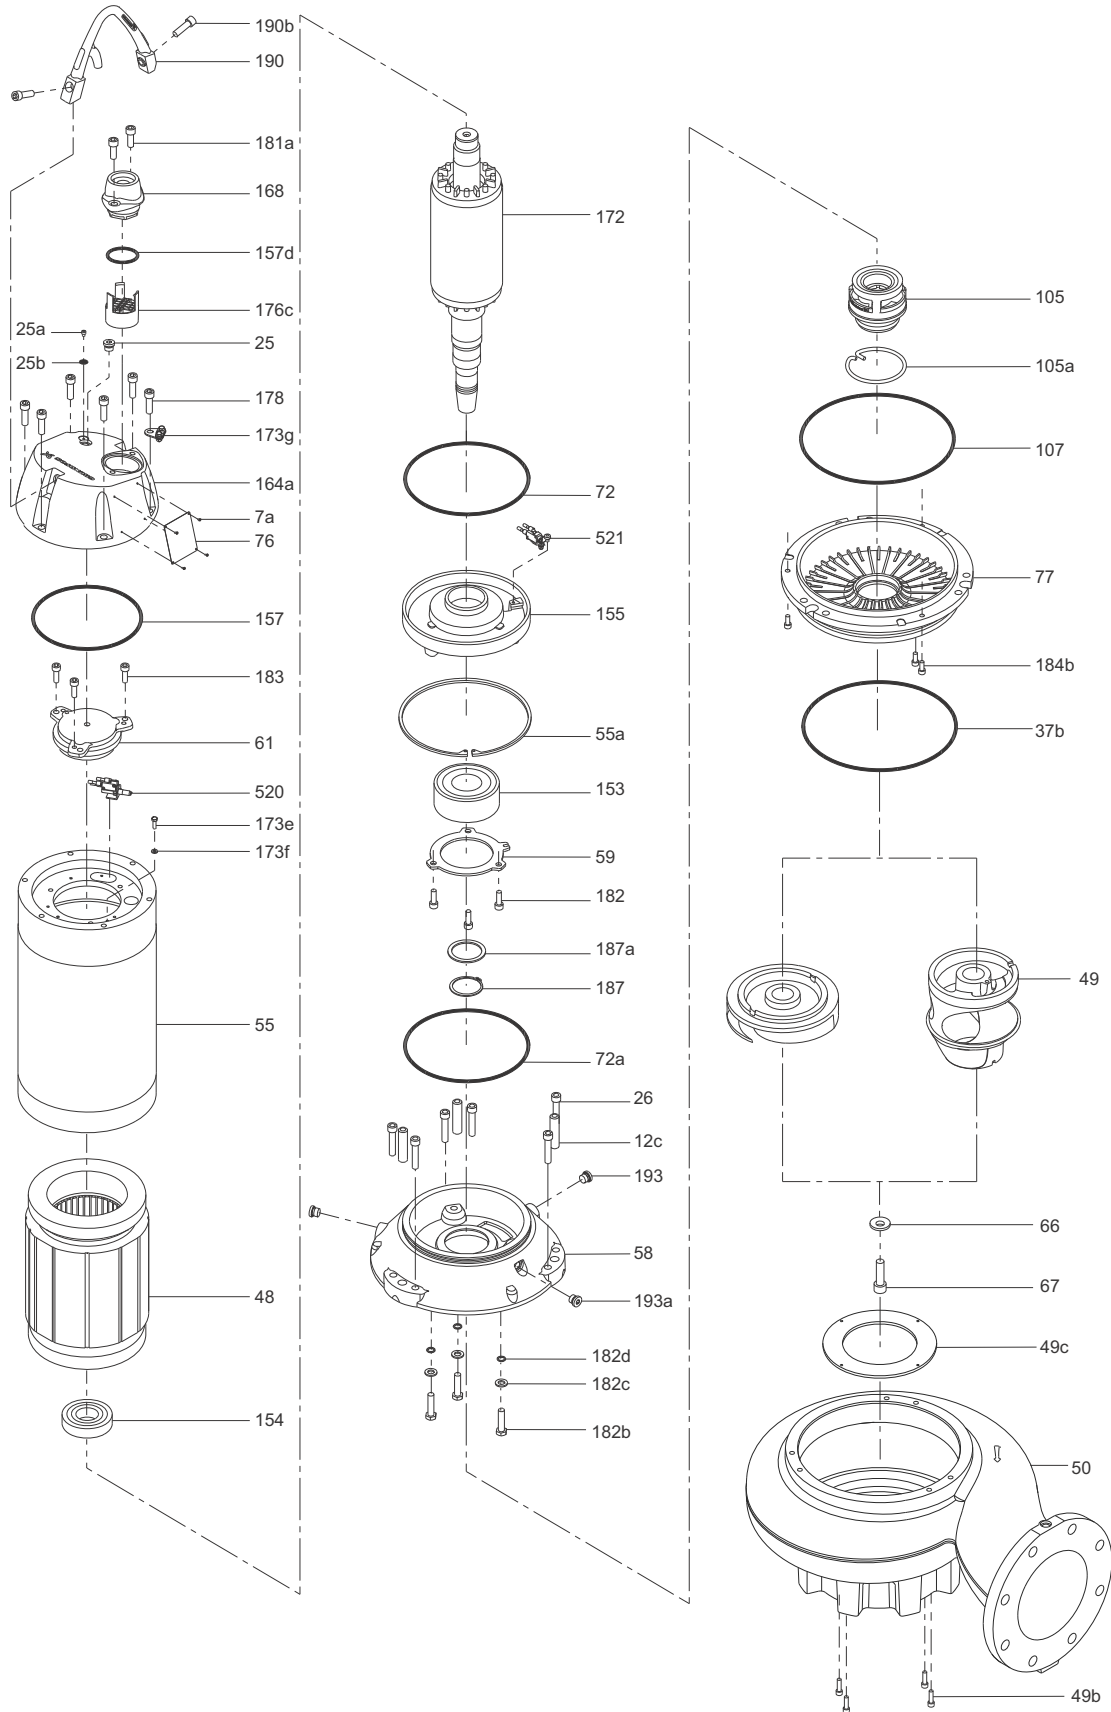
Exploded view, SL pump, explosion-proof version, 2- and 4-poles
